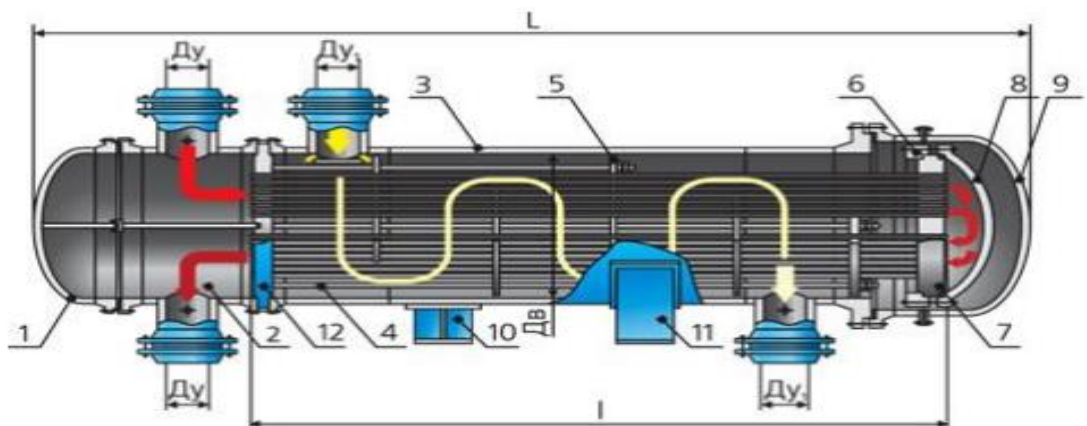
Shell-and-tube heat exchanger with a floating head [6, p. 47]: 1 - cover of the casing; 2 - distribution camera; 3 - a casing; 4 - tube bundle pipes; 5 - a partition; 6 - a half ring of a floating head; 7 - movable tube sheet; 8 - inner cover of the floating head; 9 - outer cover; 10 - sliding support; 11 - fixed support
